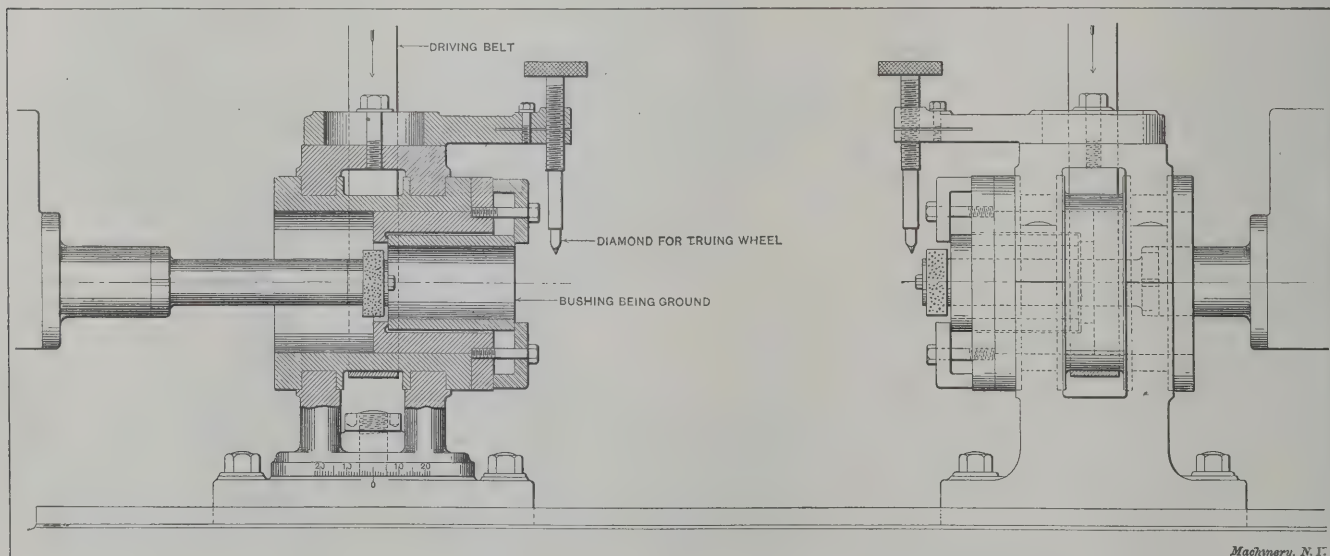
Section and Elevation of Head-stocks and Work and Relation of Head-stocks to the Grinding Wheels
